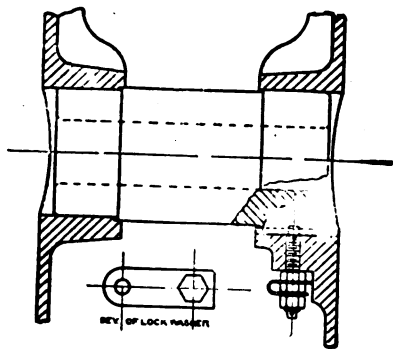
METHOD OF HOLDING THE WRIST PIN IN THE PISTON
